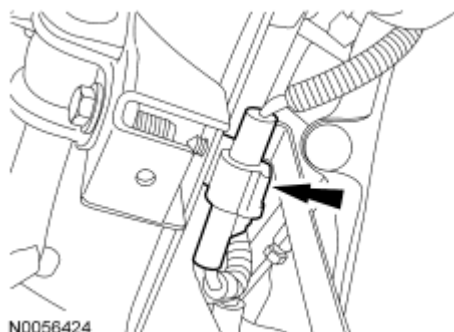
Identifying Active Torque Coupling Electrical Connector
